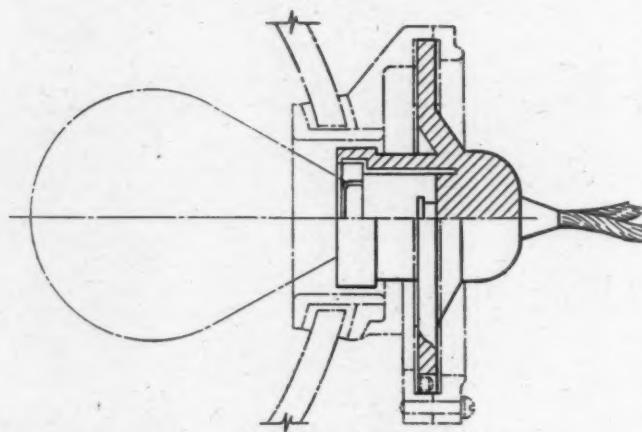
Socket assembly mounted on rubber in shear—prefocused lamp
